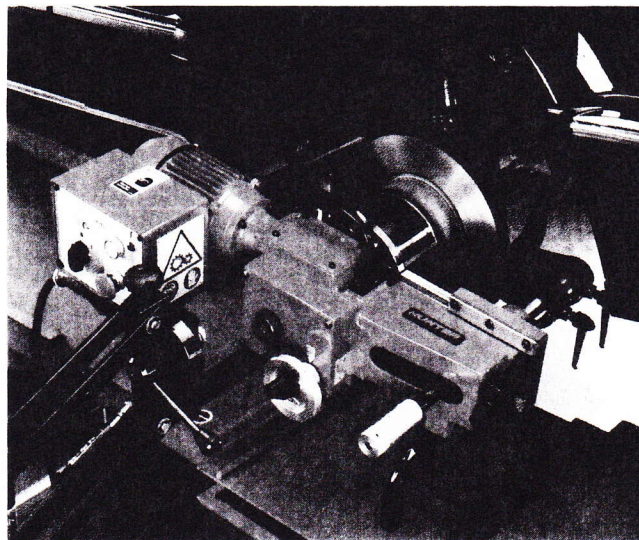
A typical brake lathe. Courtesy of Accu Industries
